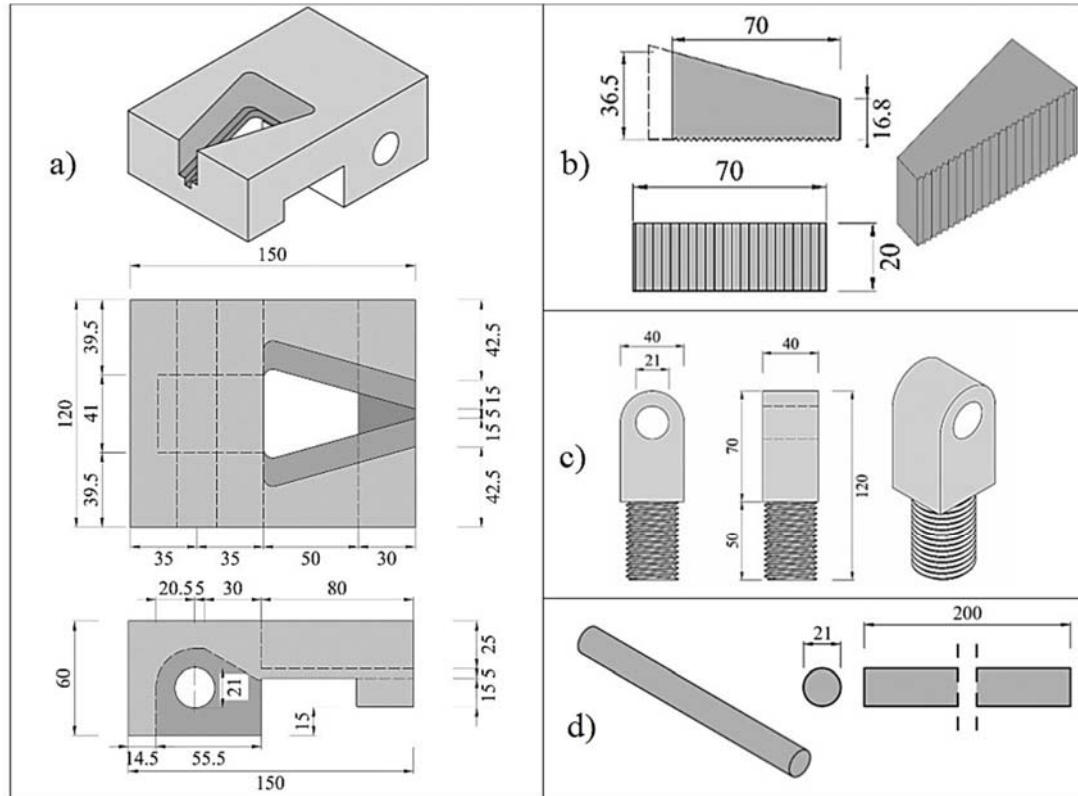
Geometry of the components of the prestressing system: a) anchorage piece, b) clamping wedge, c) tube wedge, d) steel pin (dimensions in mm)
